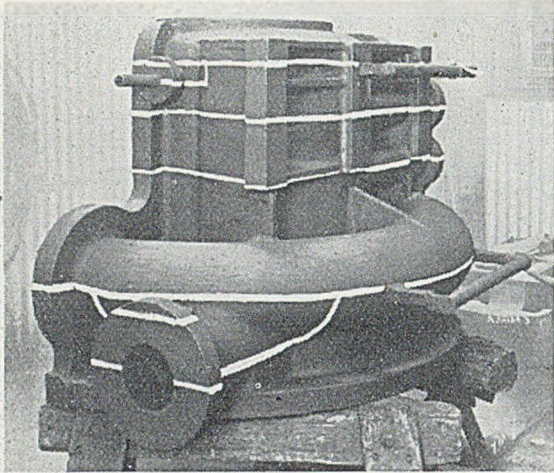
Pattern Equipment for Making the Exhaust Casing as an Assembly of Cores.
